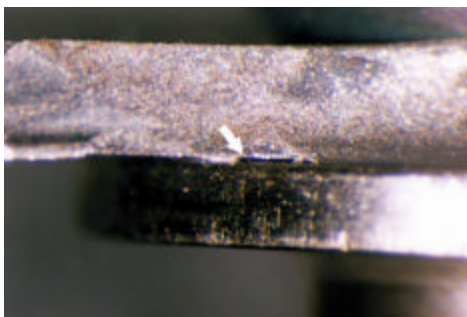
Gap between the pin flange and the control arm produced by upward ‘dishing’ of the arm beneath the rivet head.
